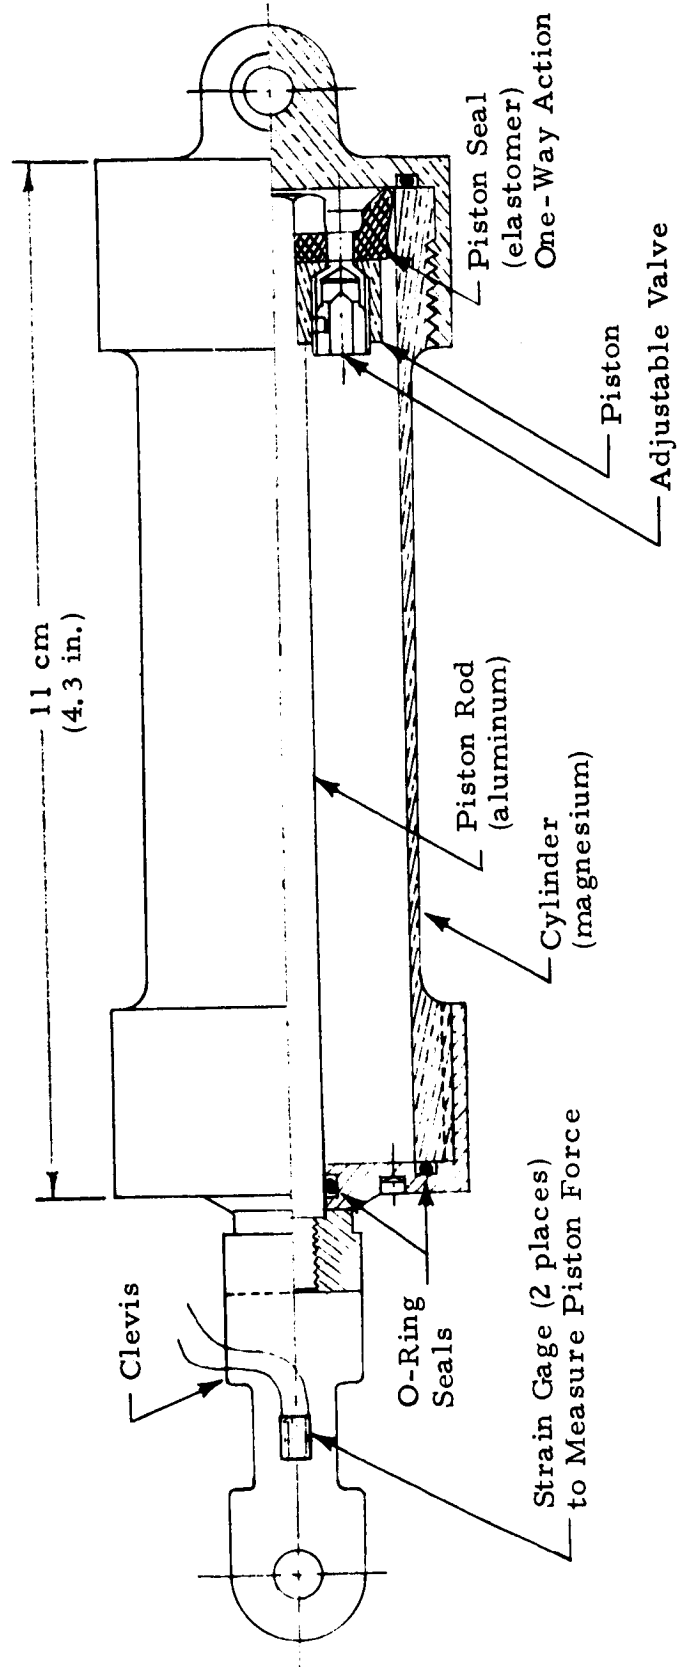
Lightweight Adjustable Shock Absorber Layout
